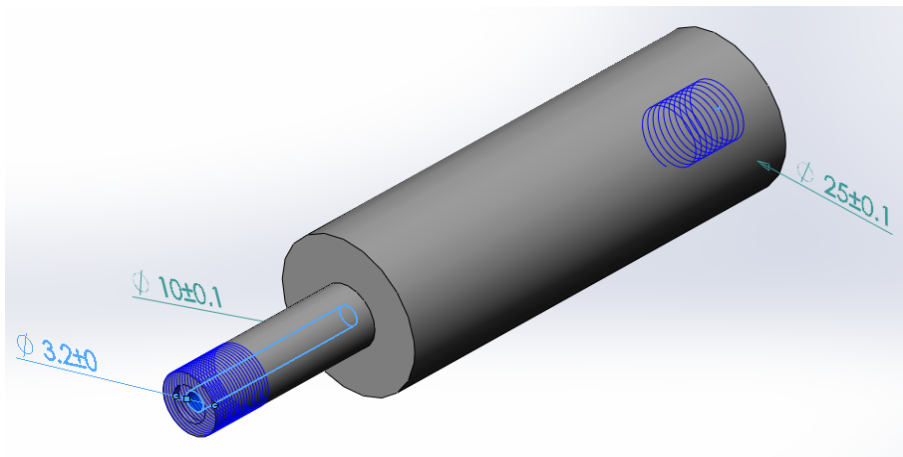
3-D design of main body of upper detachable part, all dimensions are in mm.
